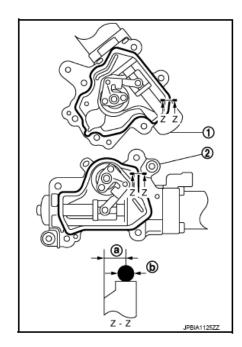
Identifying Liquid Gasket Applying Areas Of VVEL Actuator Sub Assembly Courtesy of NISSAN MOTOR CO., U.S.A.
